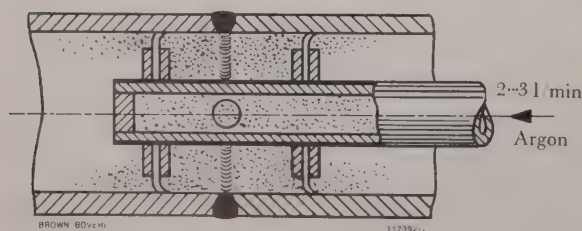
Local shielding by inert gas at the root of a butt weld between pipe sections
